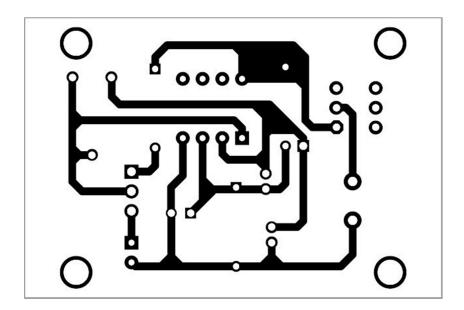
Actual-size PCB layout for the mobile phone detector circuit
